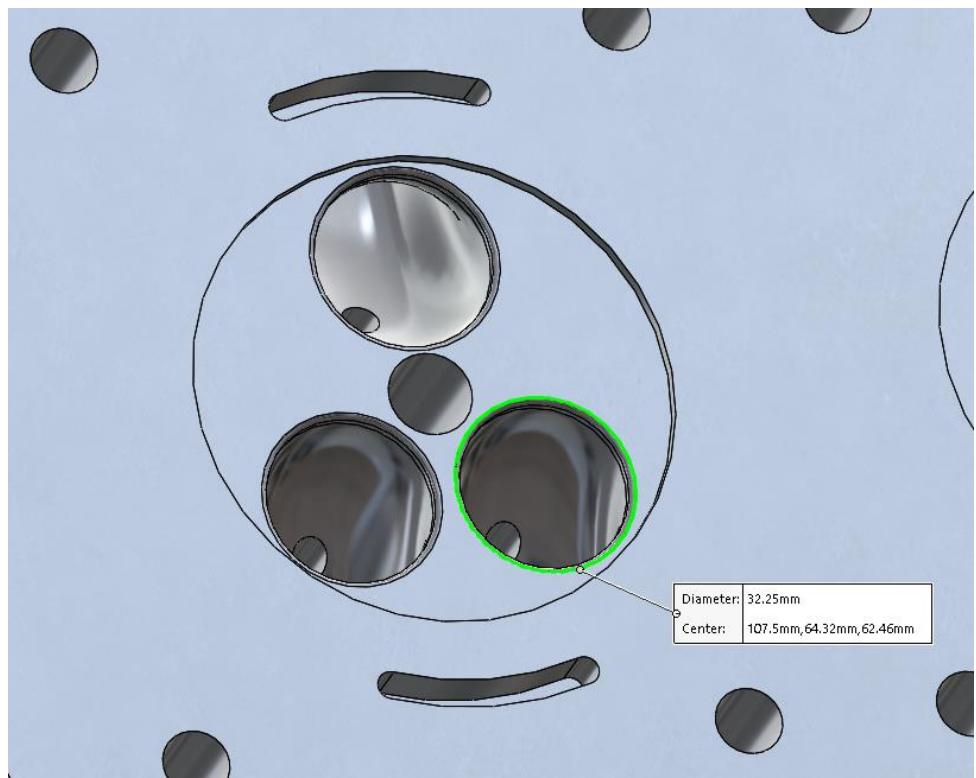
CAD and dimensions of the intake valves designed and to be optimized in 2024 year.
